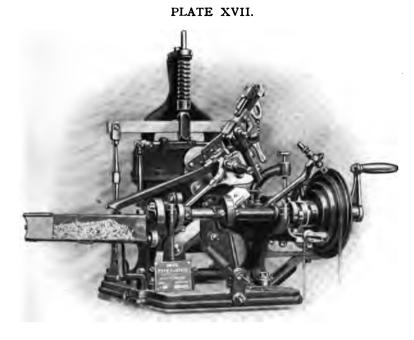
Davis pivotal typecaster ; throwing out finished type.
